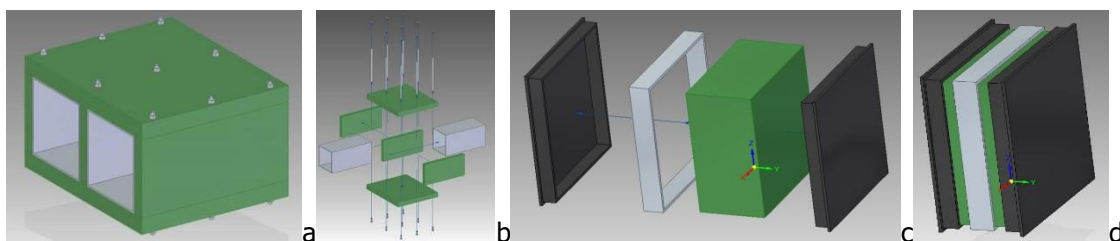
Molds designed to manufacture the CubeSat. a, b) CAD model of the double mold used for the CubeSat's body – 2 bodies; c, d) CAD model of the mold used to manufacture the CubeSat's caps
